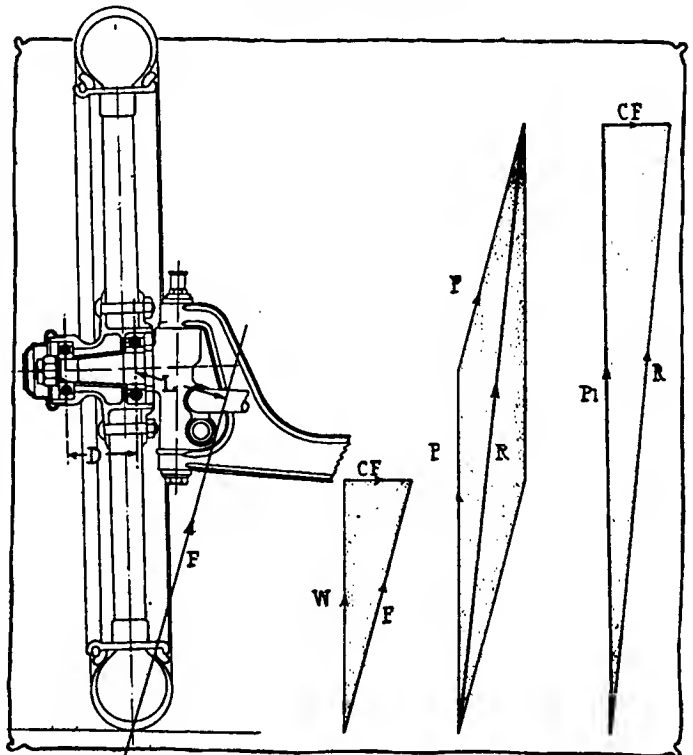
Forces acting on front-wheel bearing. Fig. 2—Diagram of forces, showing components
